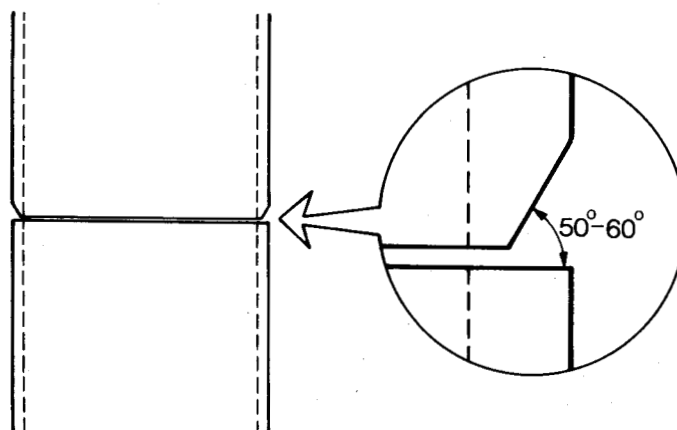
Bevelling smooth casing tubes. Principal drawing
